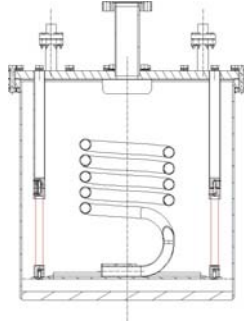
Linear Paul trap test cavity drawing. The diameter of the cavity is 300 mm. All parts are to be made out of pure niobium, except for the two insulating rods (shown in red), which will be made of sapphire.
